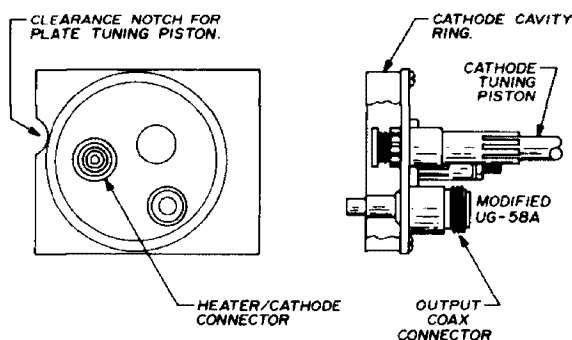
Inside view (left) and cutaway view (right) of the cathode assembly, showing location of the various components.
